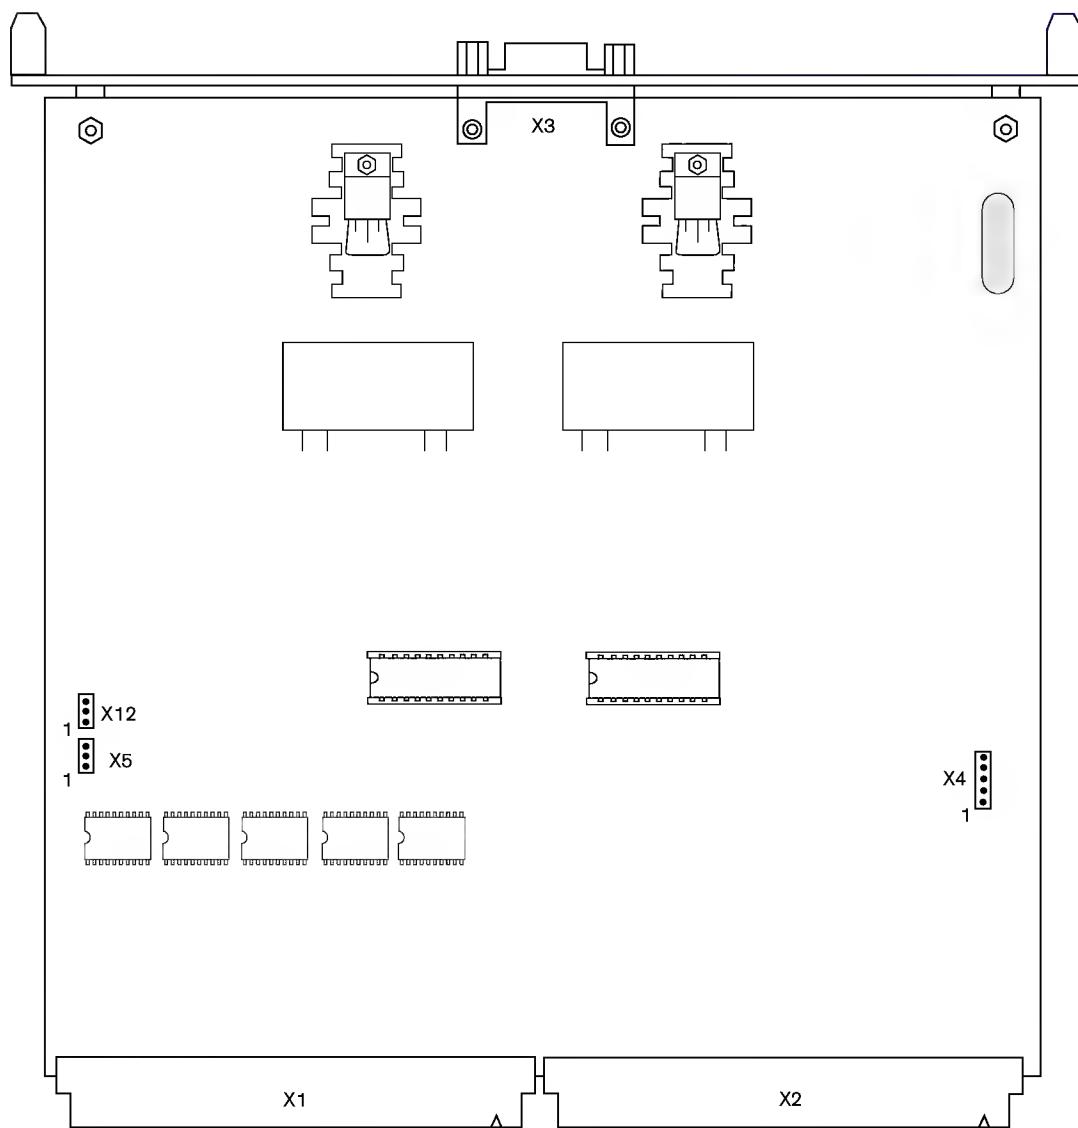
Component mounting diagram of the Paediatric Flow PCB
